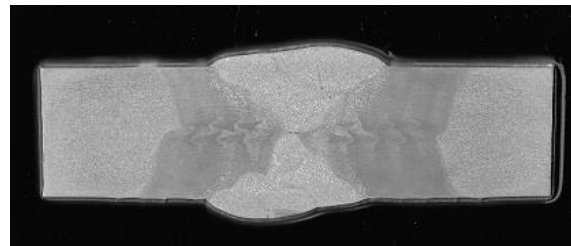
Macrograph of the joint (FSPed and welded)
